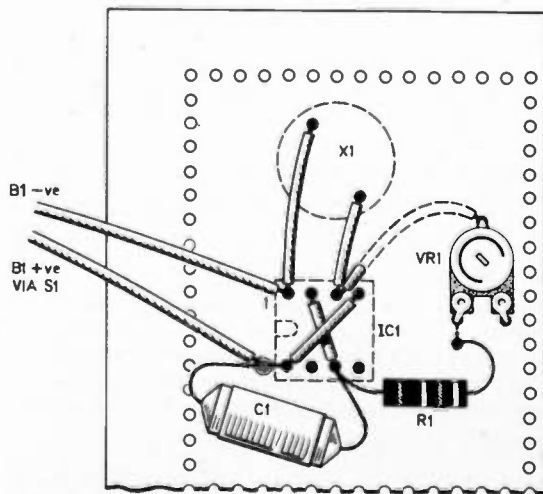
Layout of the components and wiring up details on the plain matrix board. Wiring on the top of the board is shown dotted.
